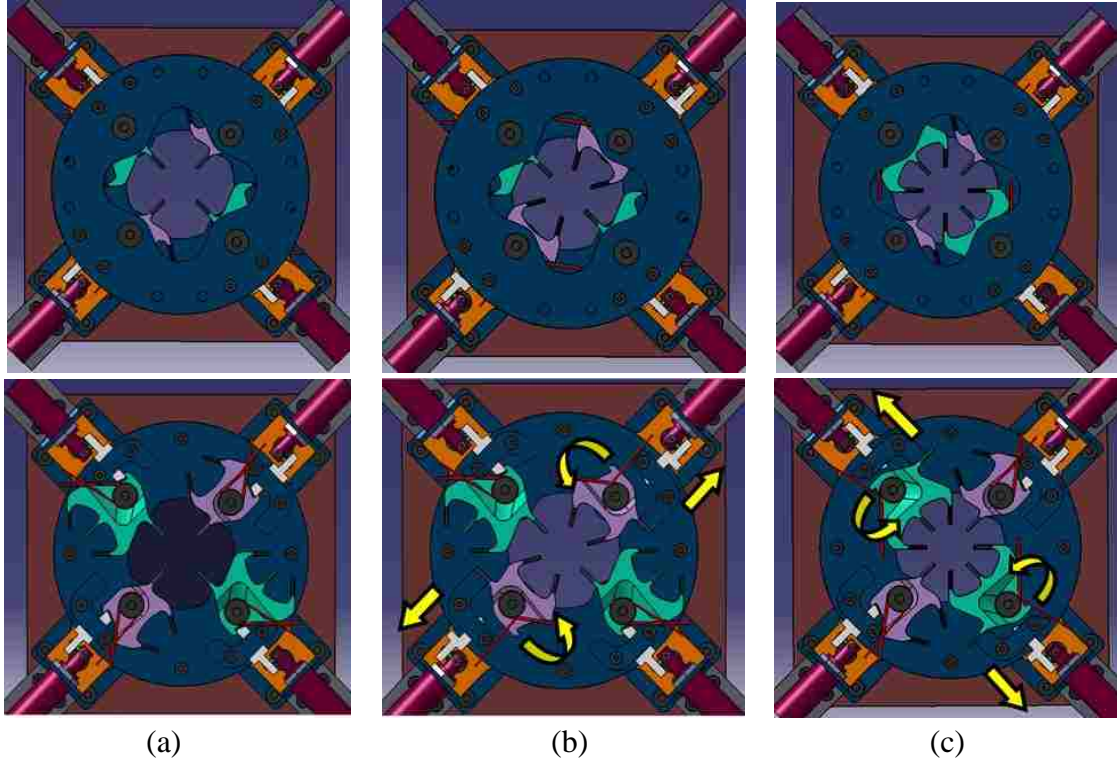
CAD models of the three blade configurations for quadrotor blade adaptive cutter design with front cover shown (top) and front cover removed (bottom): (a) 4 blades. (b) 6 blades. (c) 8 blades.
